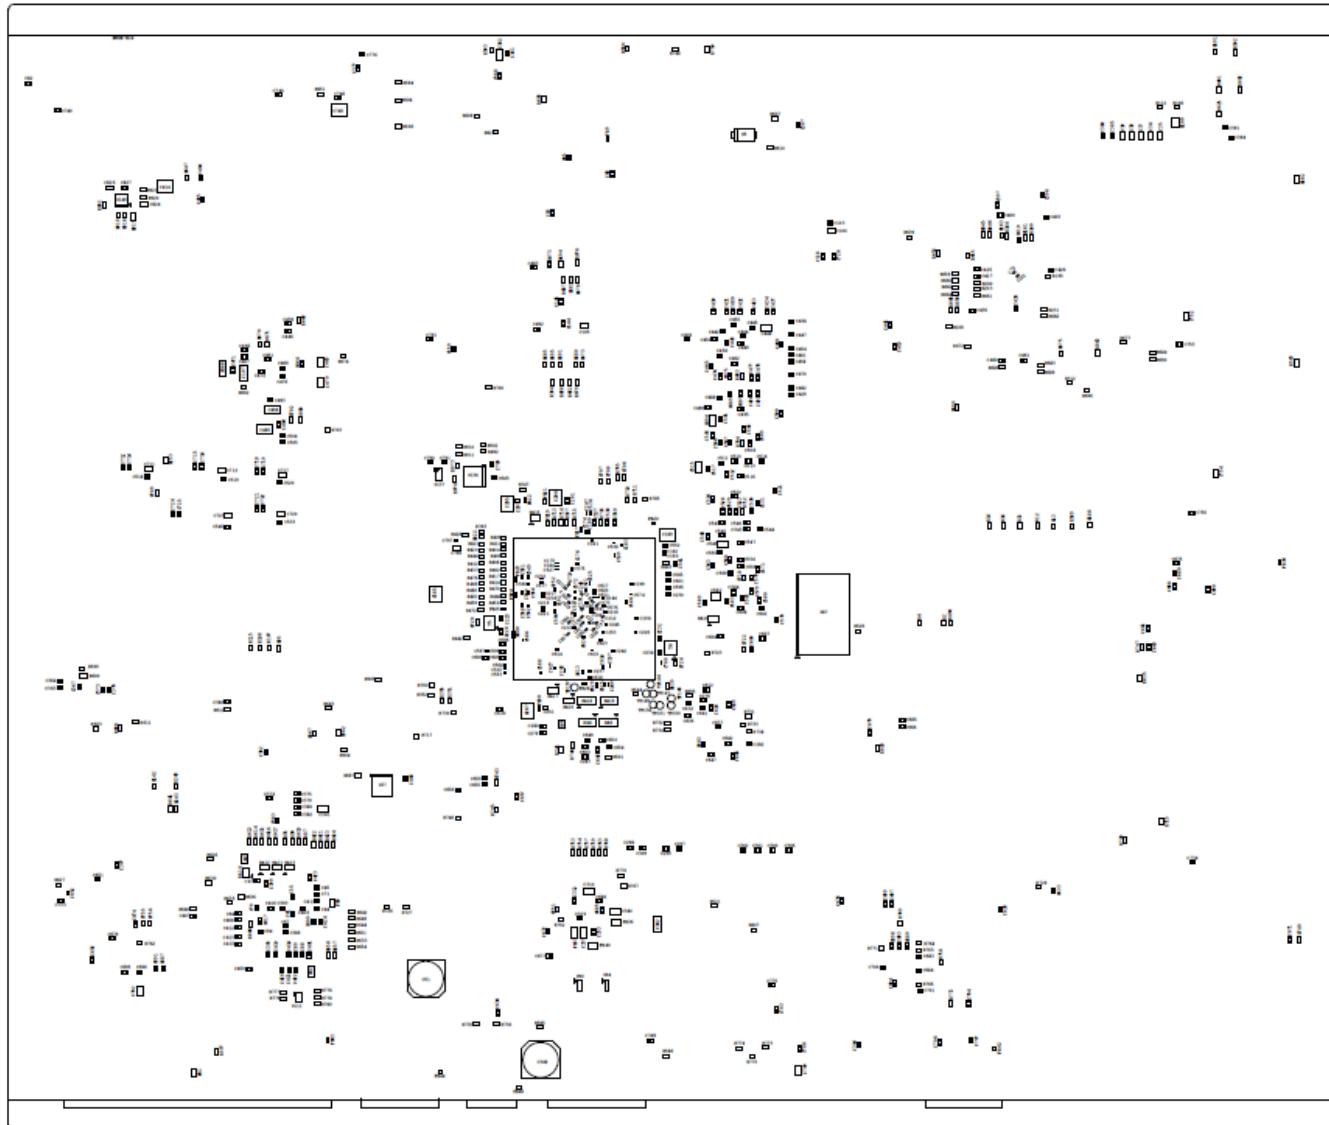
EVMK2G Board Assembly Layout - Bottom View
